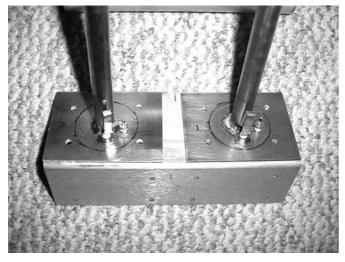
Photo C — This photo shows a completed end assembly for one pair of the duplexer cavities.
